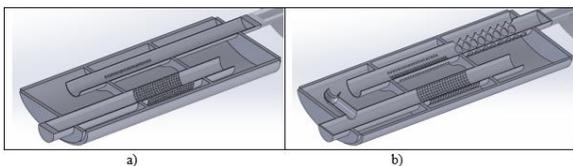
Sectional views of the exhaust mufflers; a) Simple design, b) Complex design
